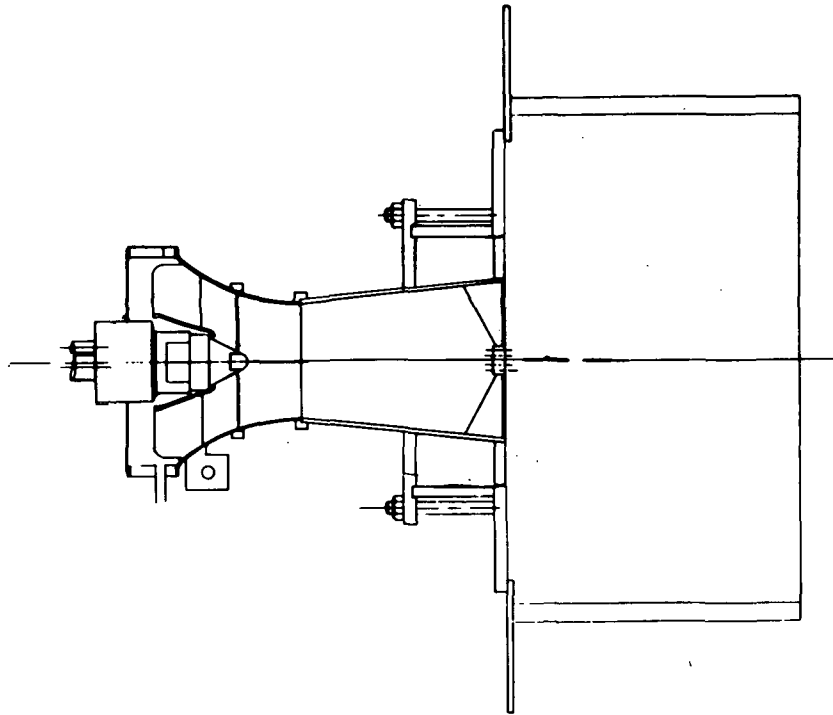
Revised Premix Tube Design Incorporating Air-Boost Nozzle
